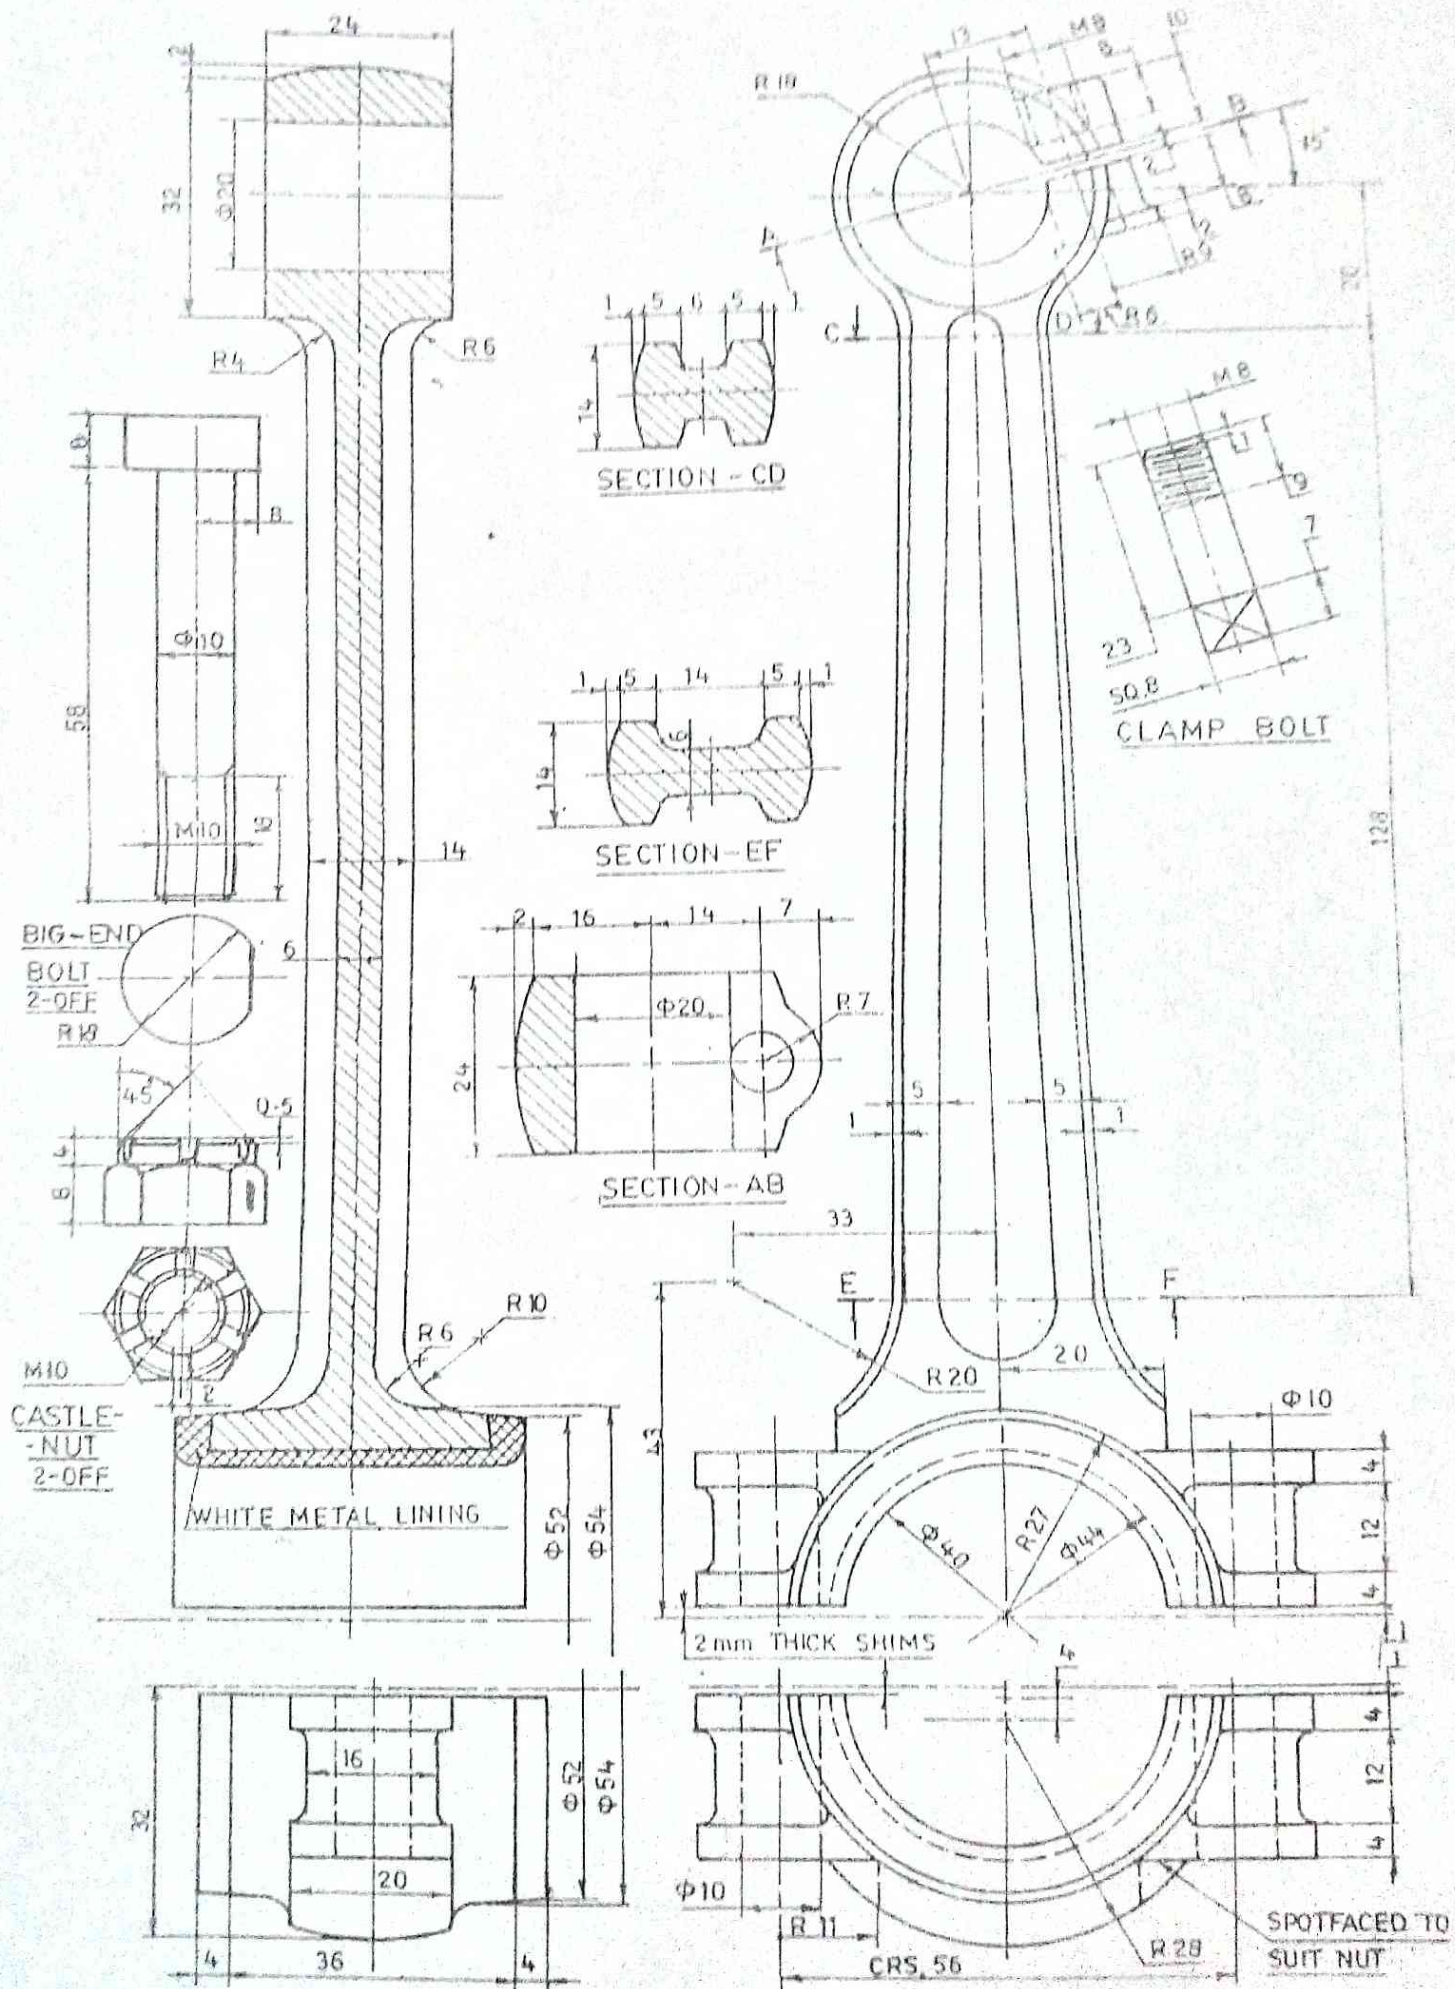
Connecting Rod for a Gasoline Engine Piston
